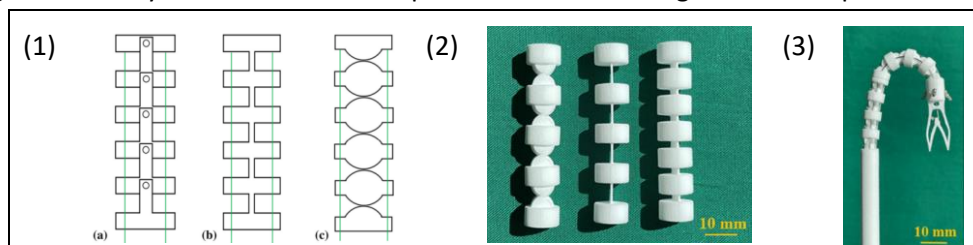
Compliant rolling contact joint snake-like structures. (1) Mechanisms (a) discrete pin-joint (b) leaf-type (c) CRCJ (2) 3D printed design prototypes. (3) CRCL Mechanism displaying minimised bending radius. (Zhang et al, 2021)
